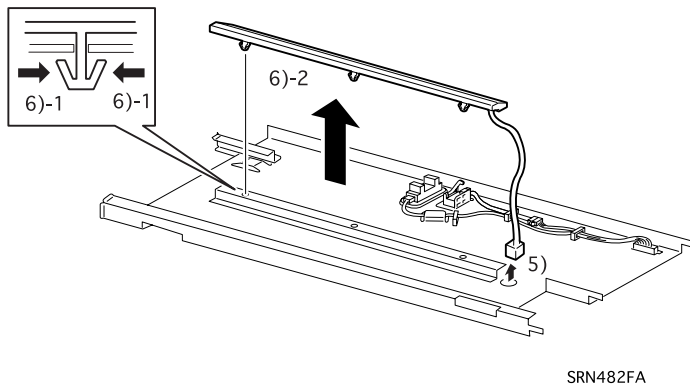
ERASE LAMP ASSEMBLY Removal
